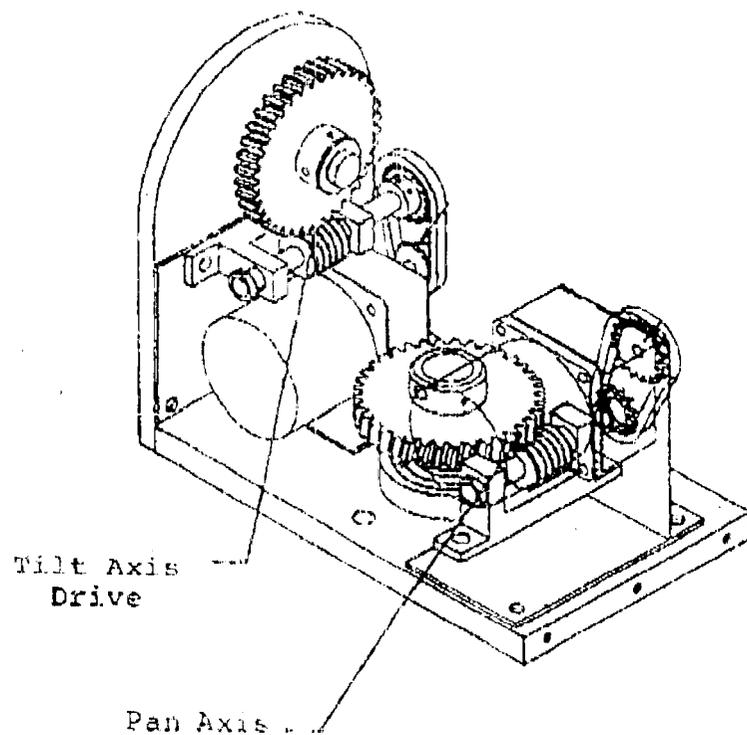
STAR Pan/Tilt Unit, Internal Drive Mechanisms
